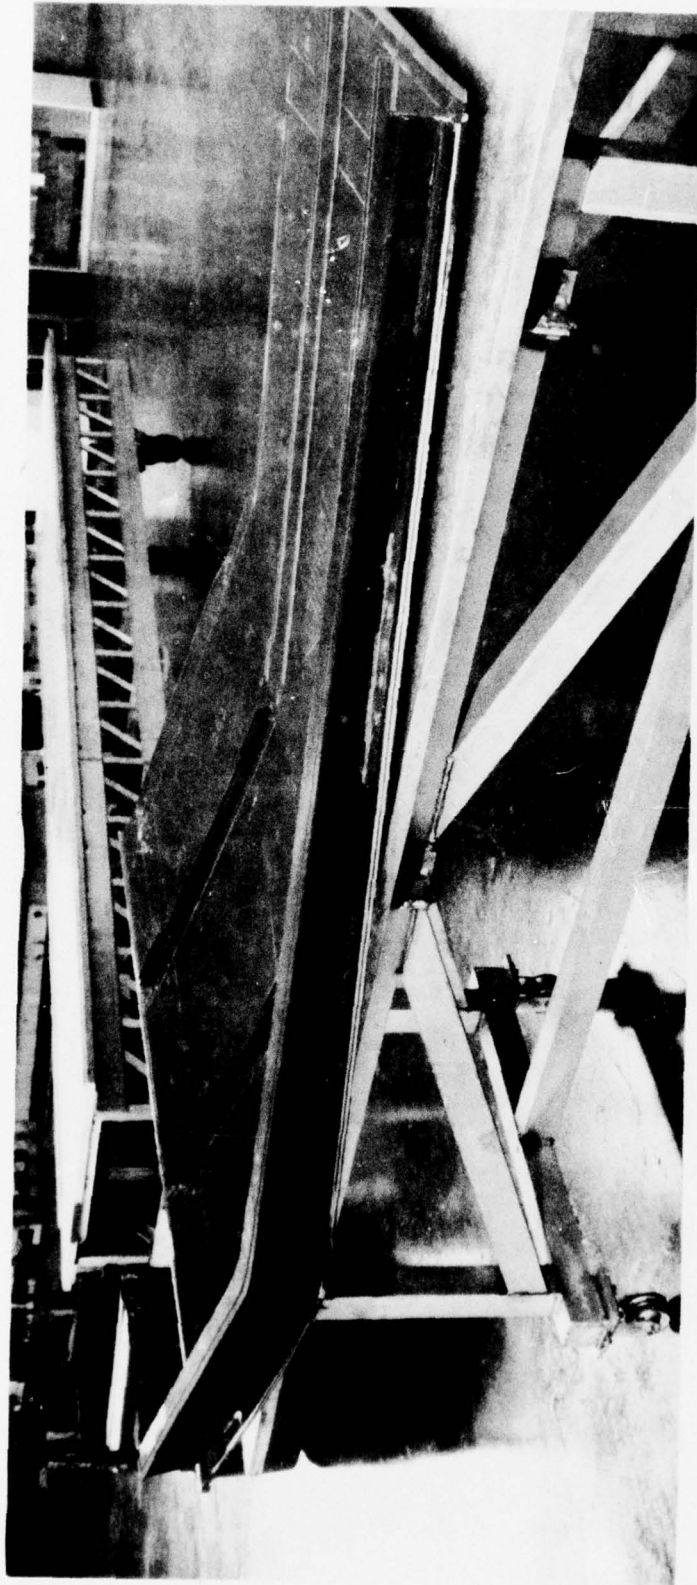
FRONT SPAR BONDED TO LOWER SKIN PANEL
